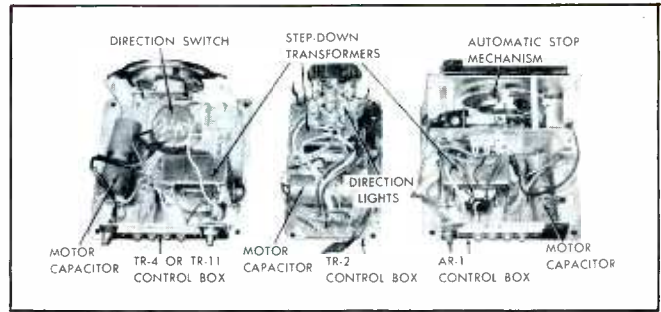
B. Chassis Views of Control Units for CDR Rotators.
